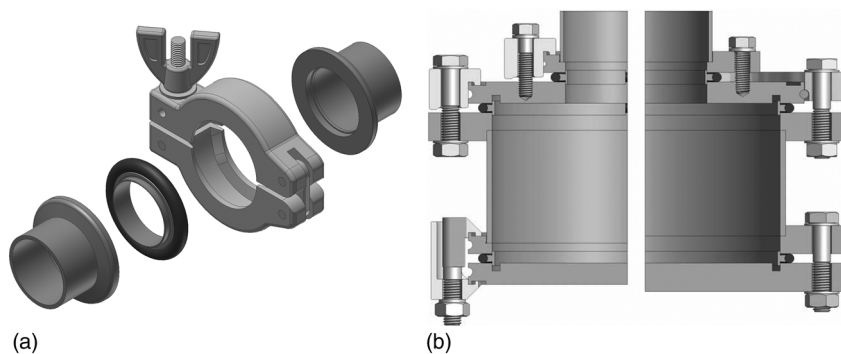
Schematic drawings of Klein flange quick release couplings (KF, a) and clamp flanged joints (ISO, b).
